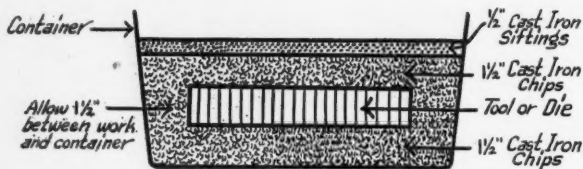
Illustration Showing an Improved Method of Packing a Tool Steel Section in Cast Iron Chips for Hardening
